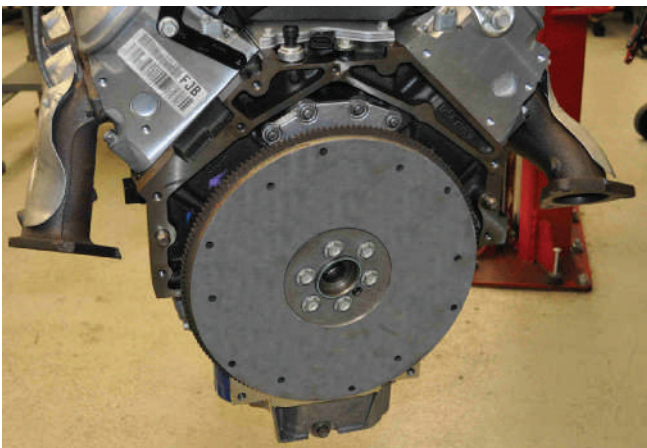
A typical flywheel mounted to the rear of an engine's crankshaft.
